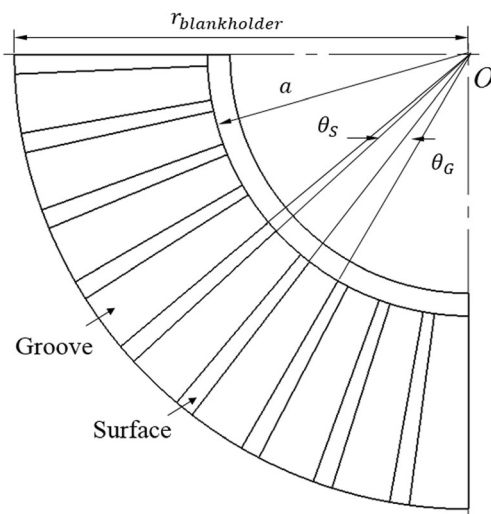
A plane view drawing of macro-textured blankholder used for cylindrical deep drawing
